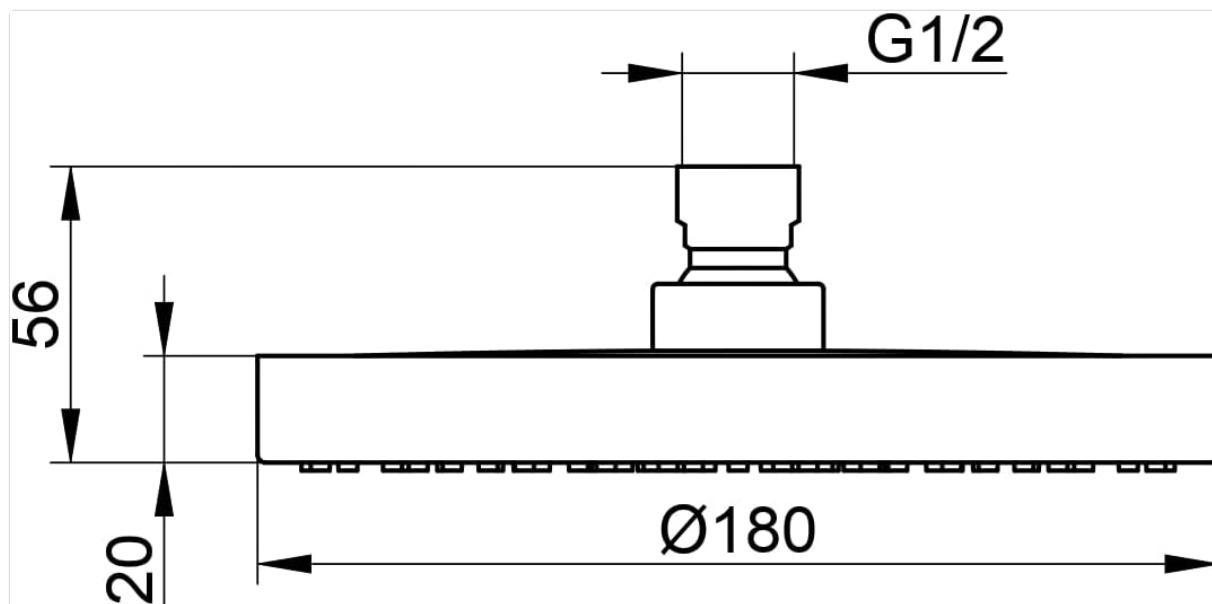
Technical drawing showing the dimensions and G 1/2" connection of the KEUCO Rain Shower Head. The diagram indicates a diameter of 180mm and a G 1/2" thread size.
